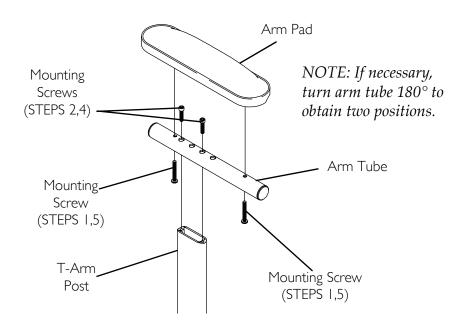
Adjusting the T-Arms - Adjusting T-Arm Depth
